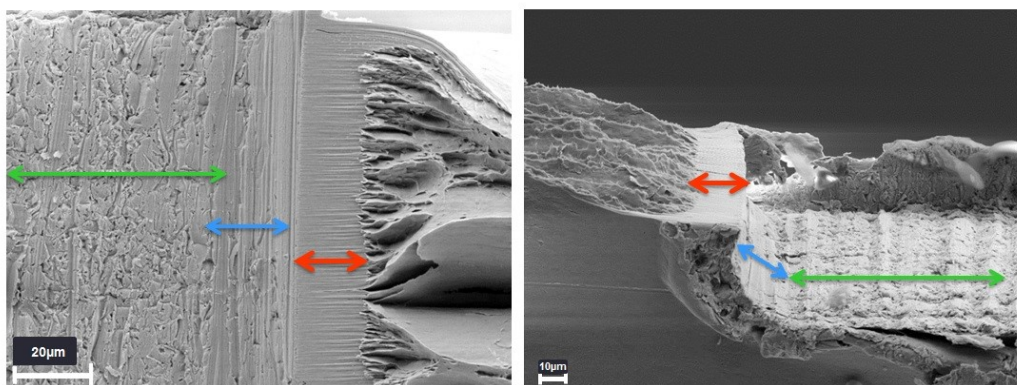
SEM images of fracture surfaces showing introduced cracks with diamond wire saw cut (green), razor blade sharpening (blue) and FIB cut (red), a) top view of fracture surface b) an inclined view of the fracture surface.
